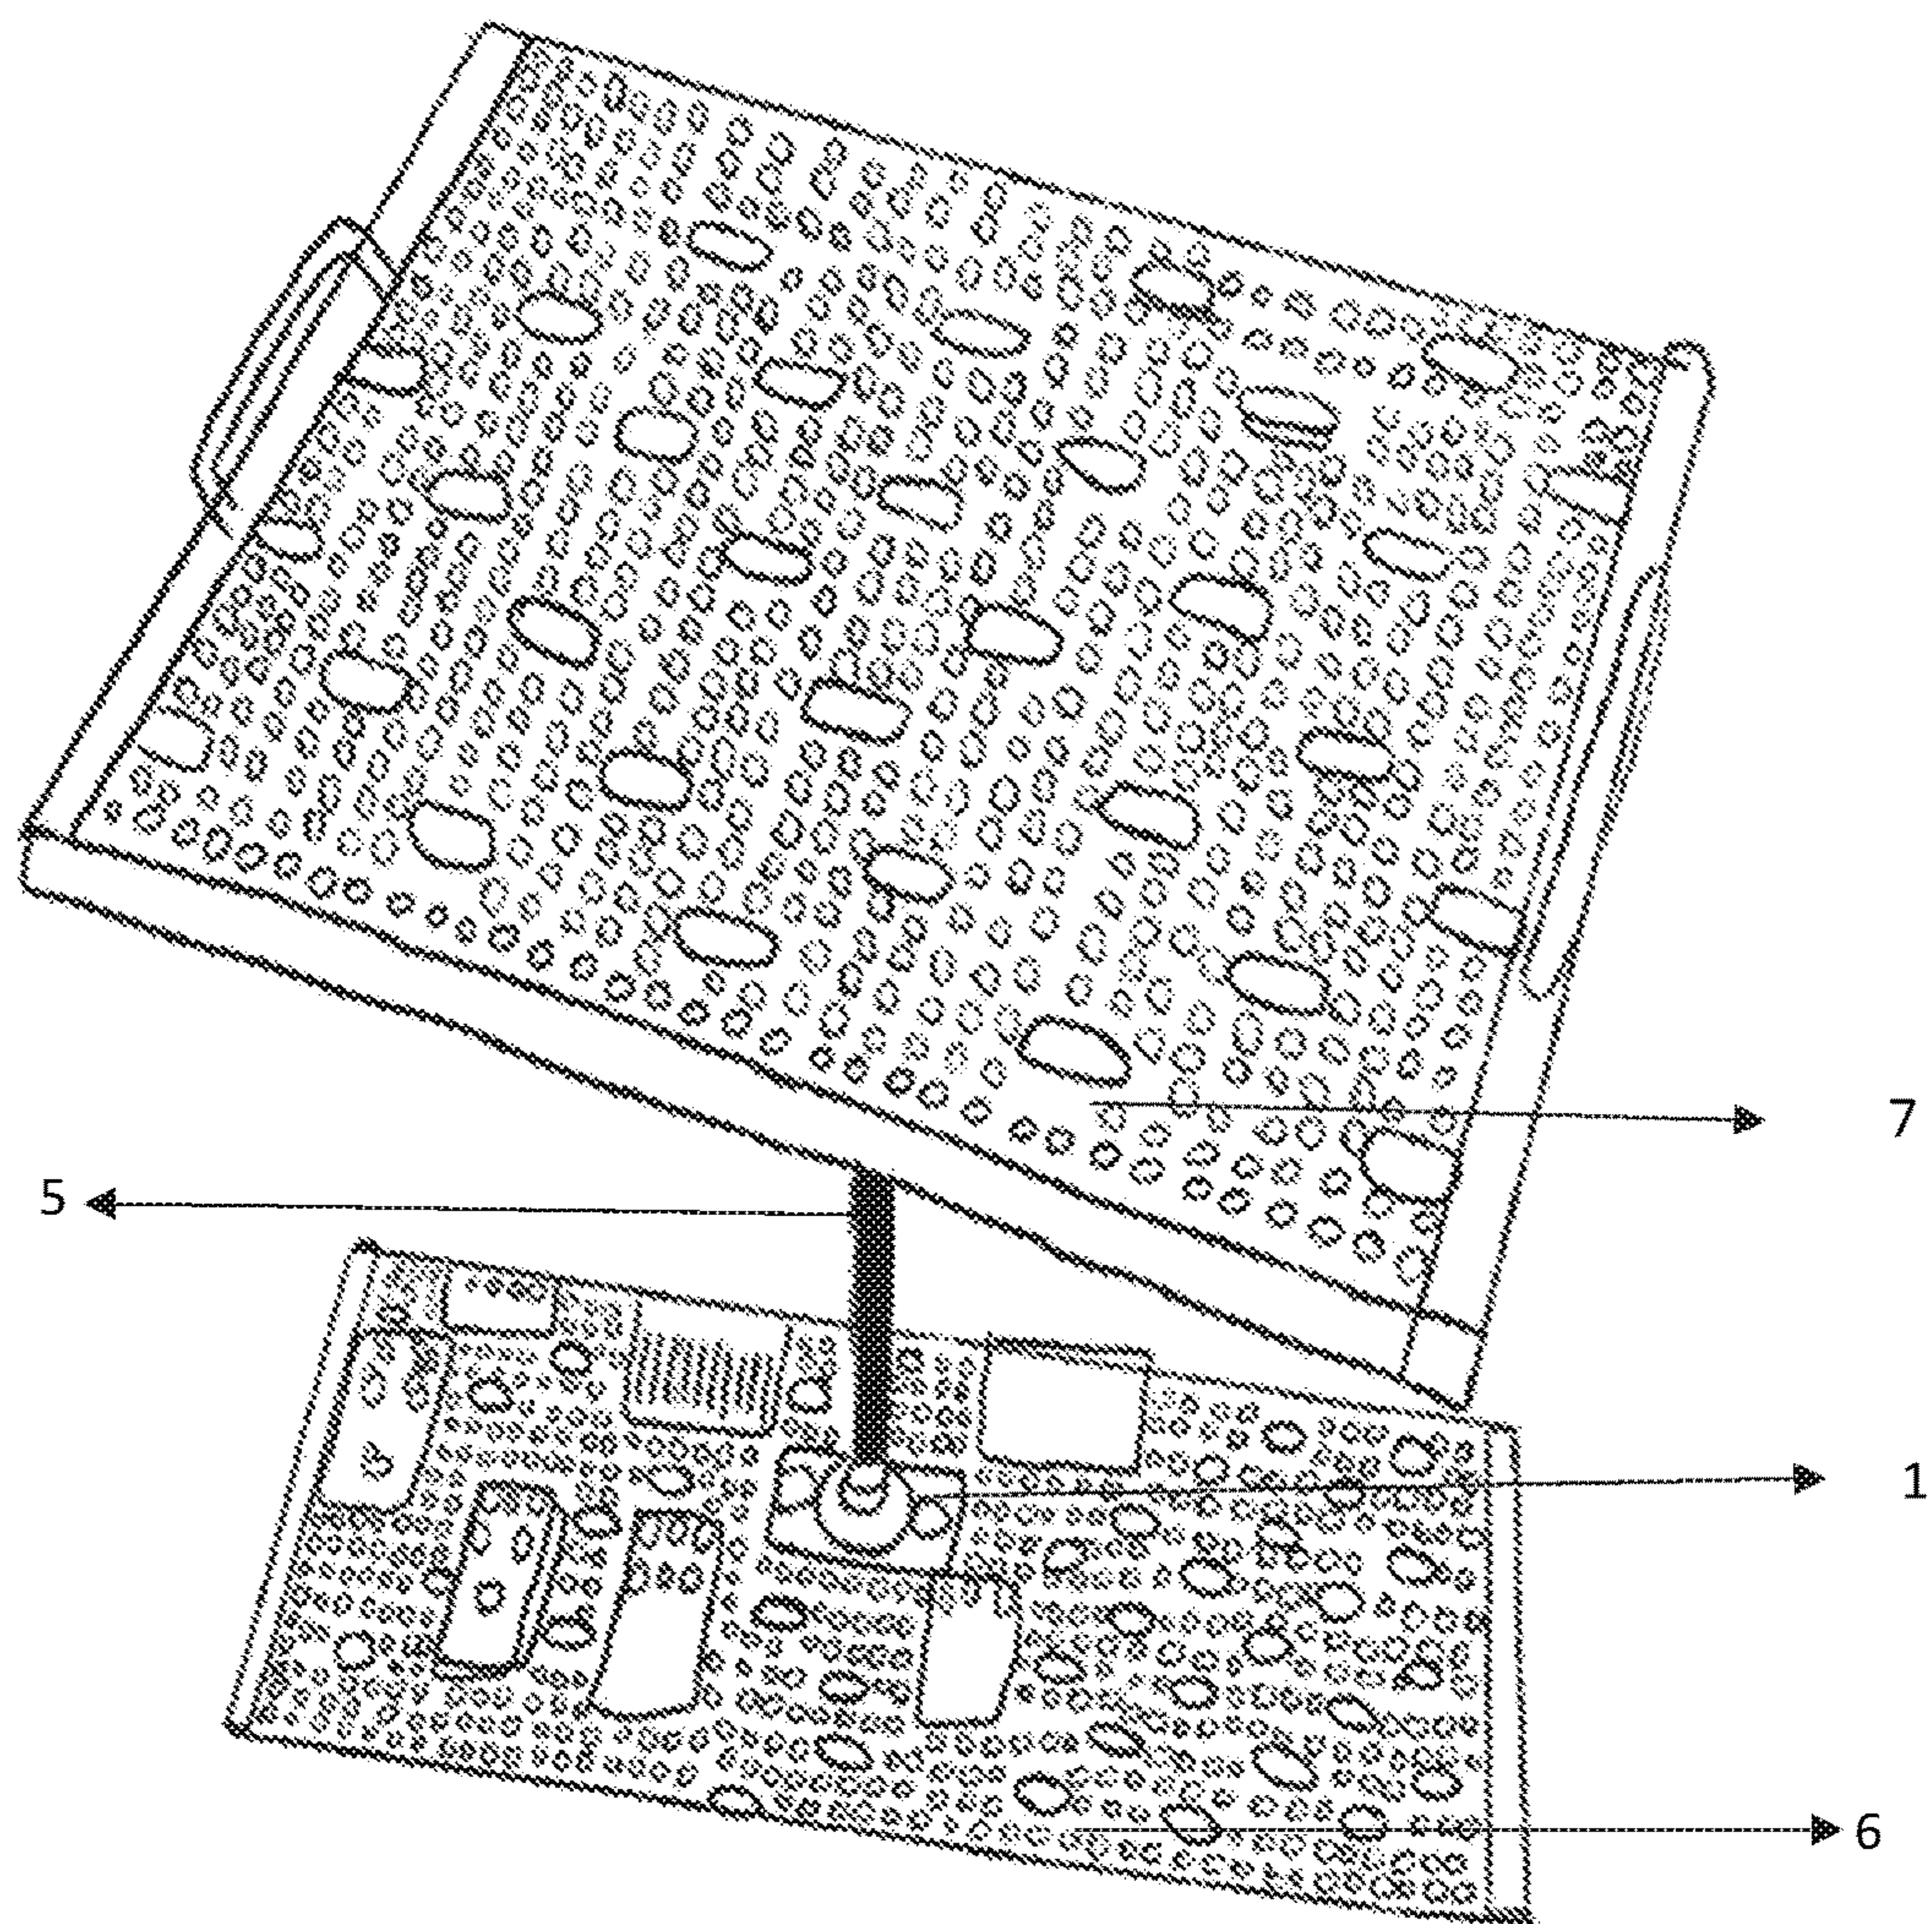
MODULAR STAND MOUNTED ON A PEDAL BOARD SUPPORTING A SECONDARY PEDAL BOARD
